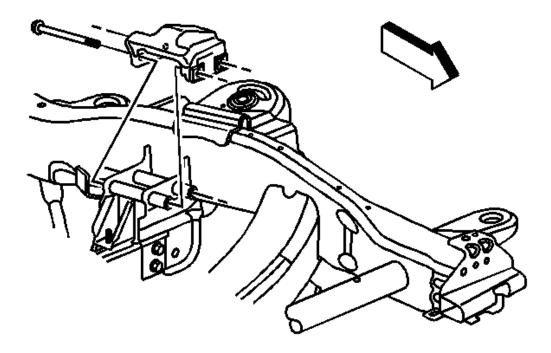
View Of Left Engine Mount Bracket Bolts Courtesy of GENERAL MOTORS CORP.
